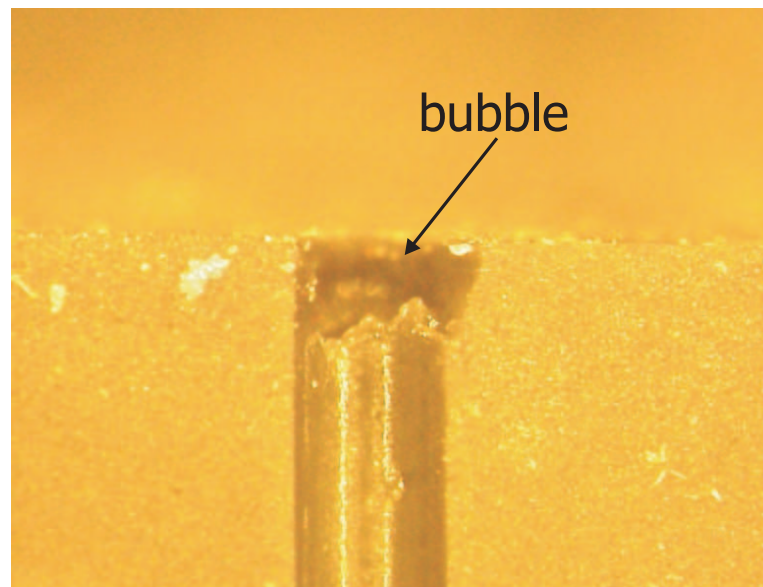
Encapsulated air led to bubbles, so called bubbles, inside the valve body material and led to failure of the casting process.
